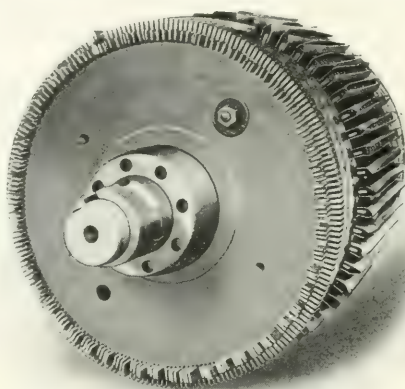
JIG USED IN WINDING TWO PIECE COILS
